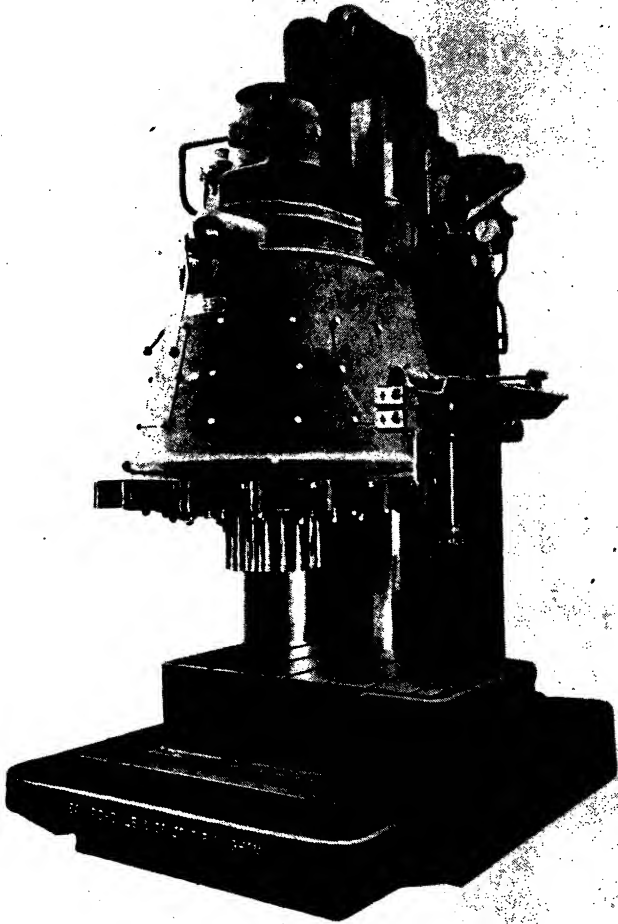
B. MULTI-SPINDLE DRILL WITH MOVING DRILLING HEAD
